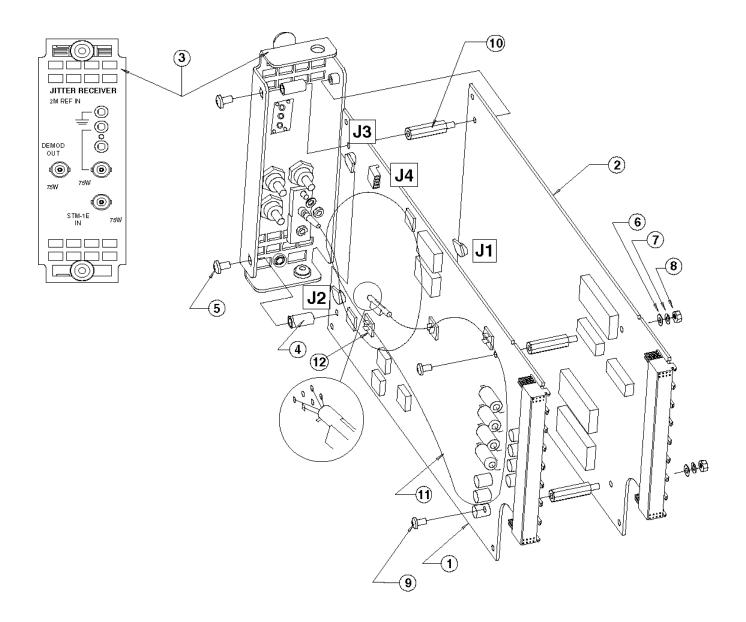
A1N/A1R STM1/4 - e/o Jitter Rx Module - Exploded View
